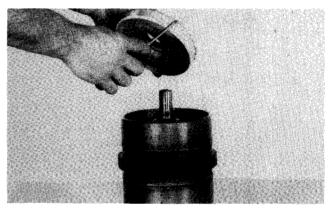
Install clutch piston inner and outer seal rings. Install clutch piston in clutch drum, use caution as not to damage seal rings.
